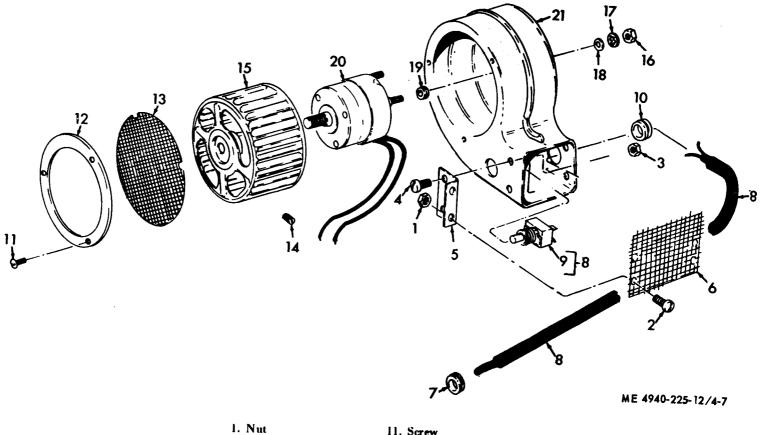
Rear ventilator fan assembly, removal and installation.
